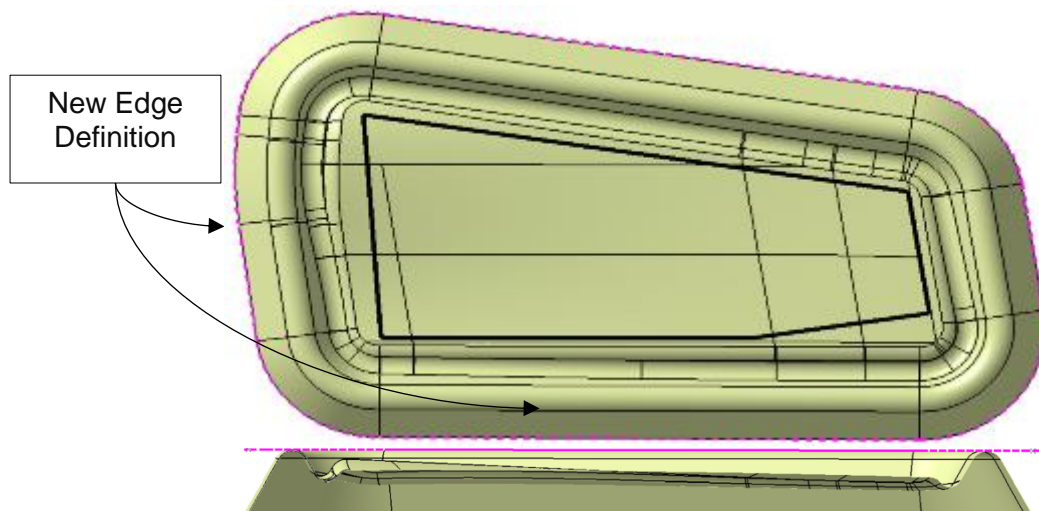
Concept-4 Tool and Blank – Top and Side Views
